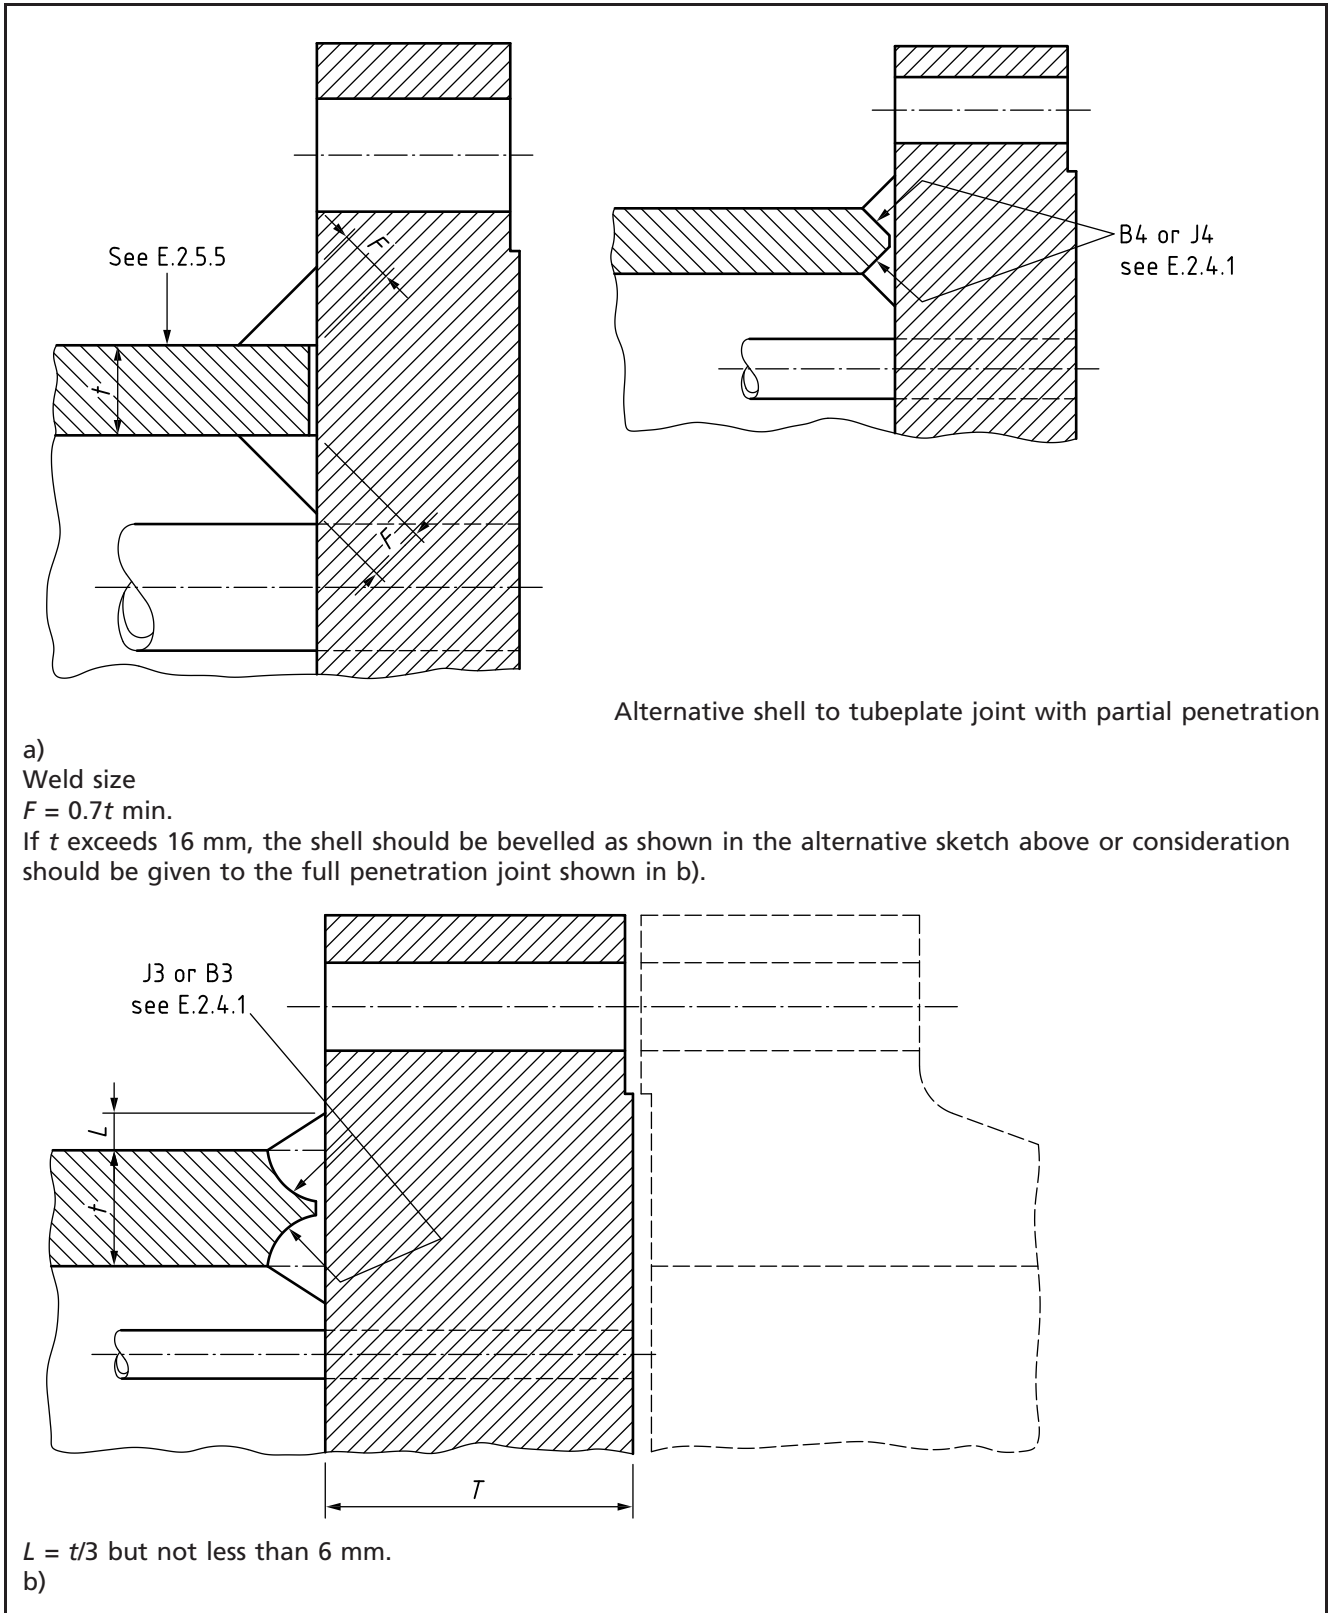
Tubeplate to shell connections: accessible for welding from *outside* of shell only
